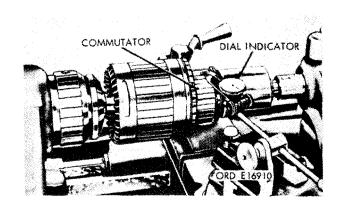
CHECKING COMMUTATOR RUNOUT.
